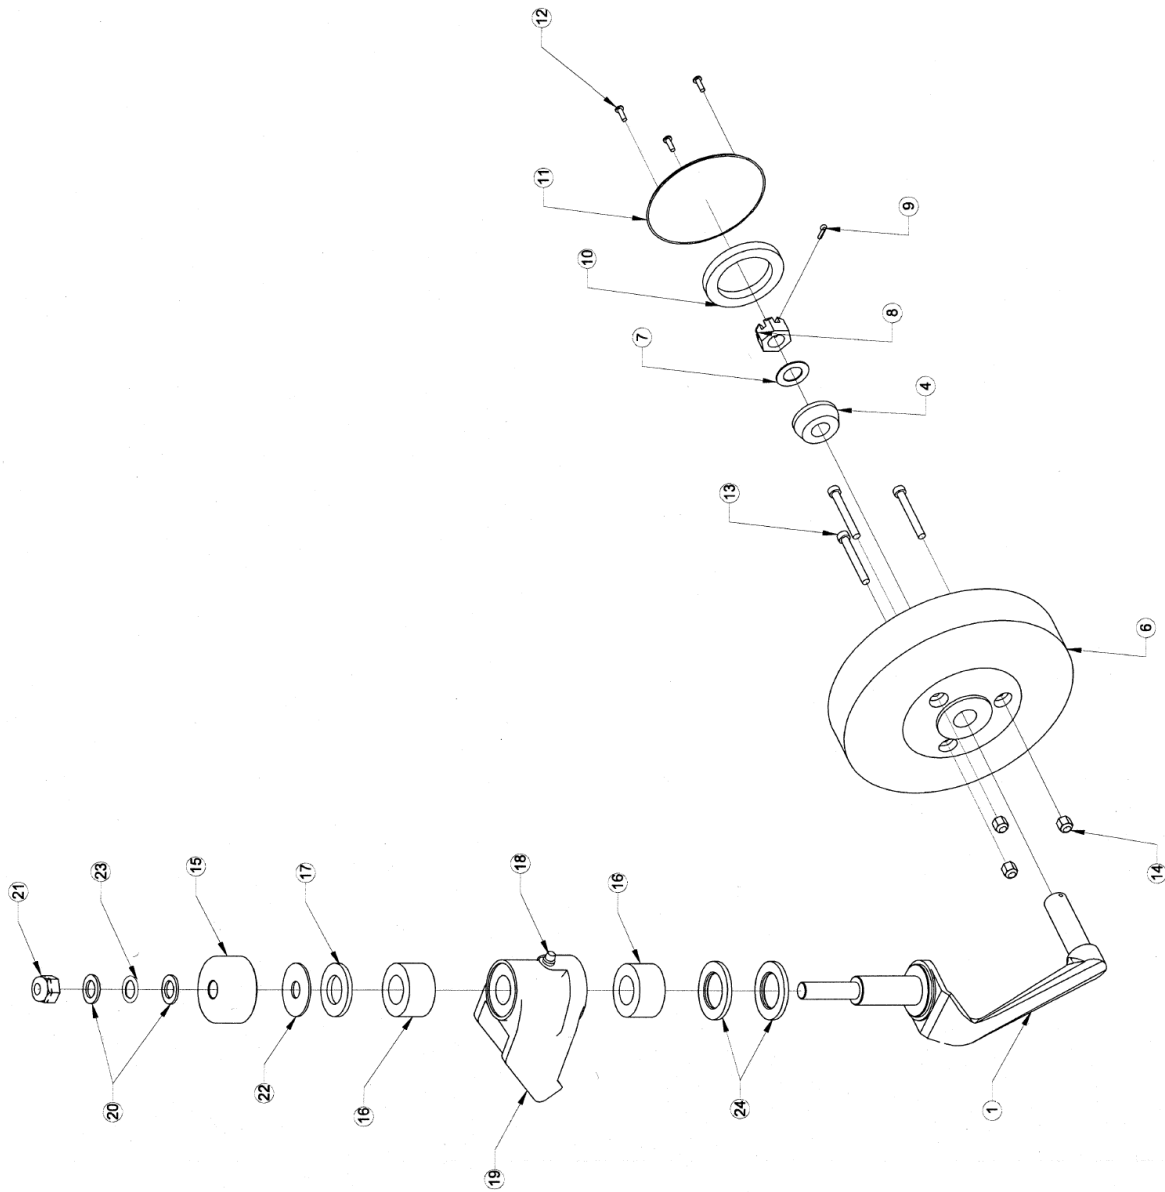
P/N L44000-3-24B (Alt. L44000-D501A) SWIVEL TAIL WHEEL EXPLODED VIEW
